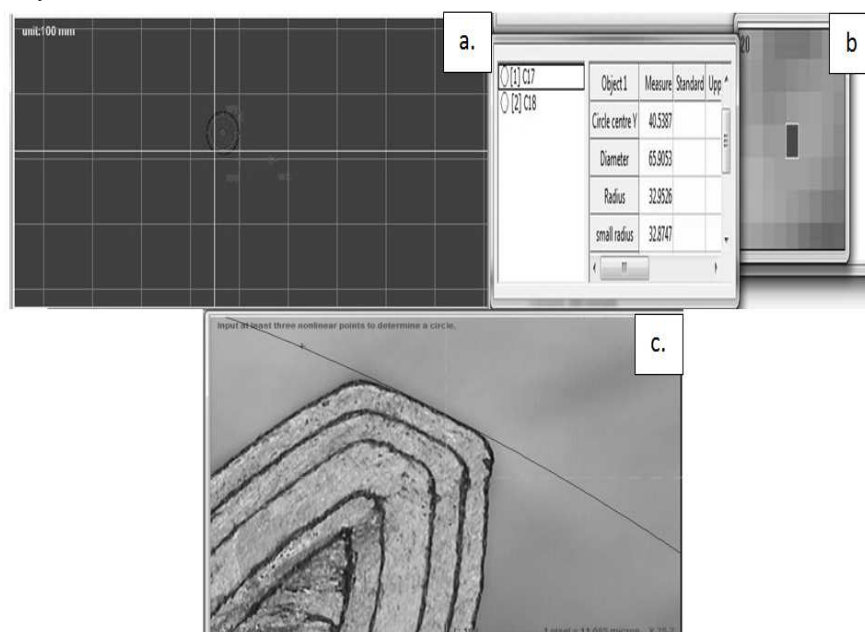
Machine Vision to Measure the Geometric Accuracy of the Printed Models. (a) Major and Minor Diameters Marked through Non-Linear Points on the Gear in Machine Perspective (b) Major Diameter Measured on Carbon Fiber PETG Model with Descriptive Measurement Data. (c) Major Diameter Marked by Selecting Non-Linear Points on the Carbon Fiber PETG Model.
